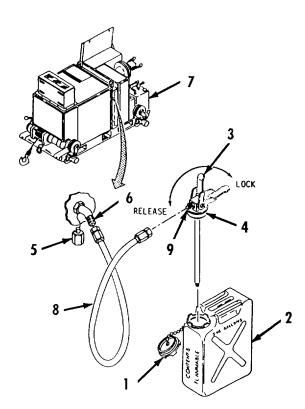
Fuel System - 600 GPM Pump External Fuel Can, Adapter and Fuel Hose Removal.
